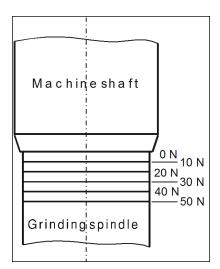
INDICATOR OF GRINDING PRESSURE AT GRINDING SPINDLE VM2150SV
